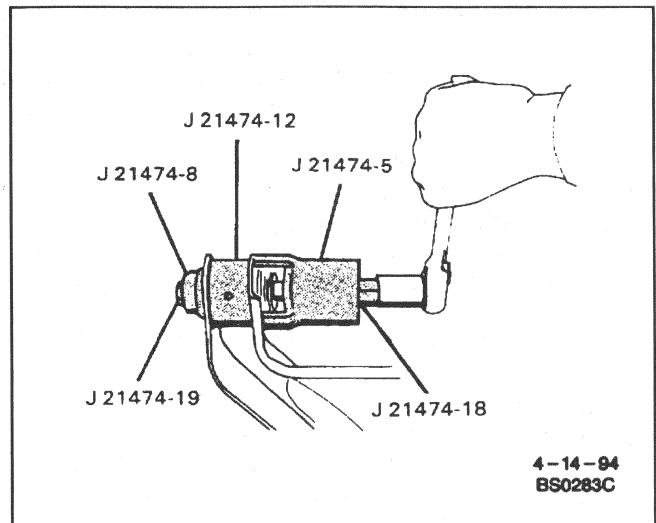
Installing Front Lower Control Arm Rear Bushing
